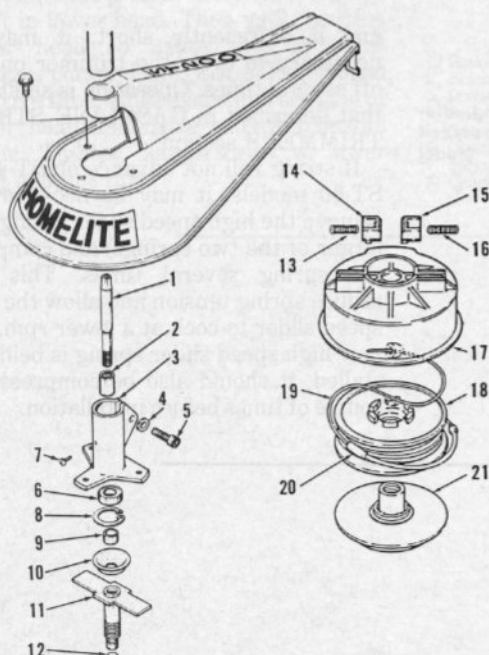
Exploded view of lower head on Model ST-200. Components (11 through 21) are used on Models ST-80, ST-100 and ST-120.
